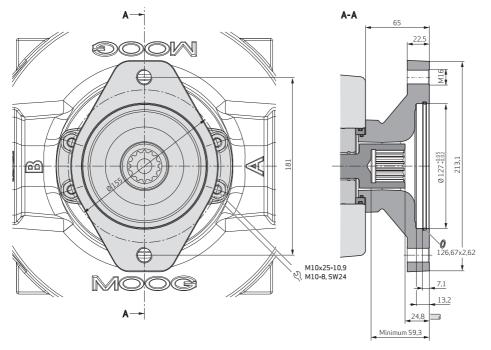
Adapter flange SAE-B with 13-tooth shaft
